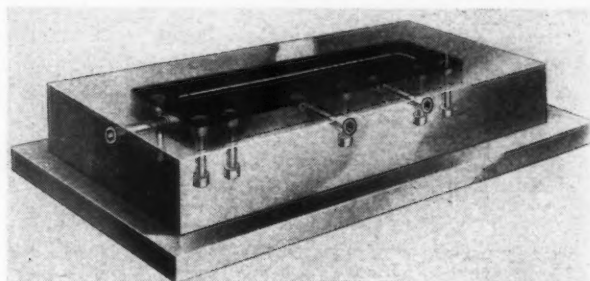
Phantom view of a deep drawing die assembled from four sections of Carboloy, showing some of the attachment points. The carbide portion is over 12 in. long.
